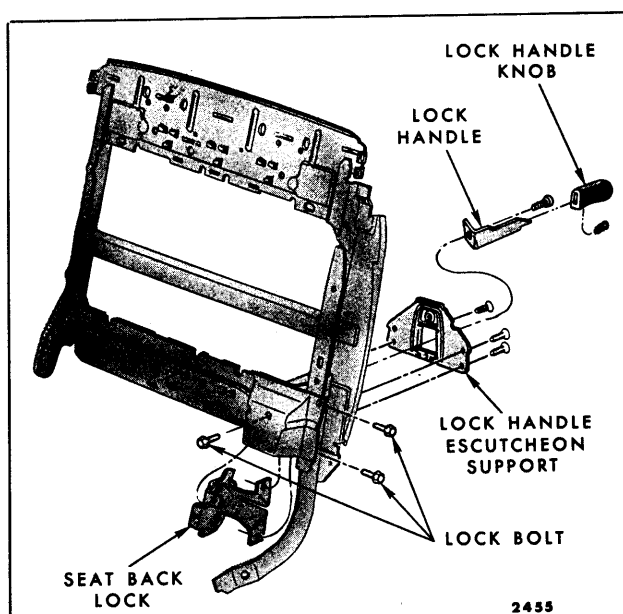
Front Seat Back Lock "A, B & X" Two-Door Styles, Standard Full Width Seat
